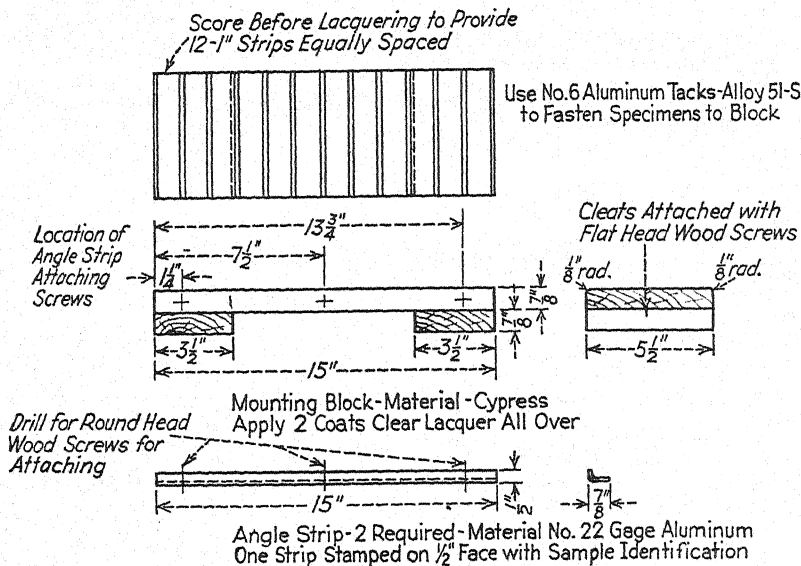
Apparatus for Mounting Straight Rubber Specimens, Method A.
